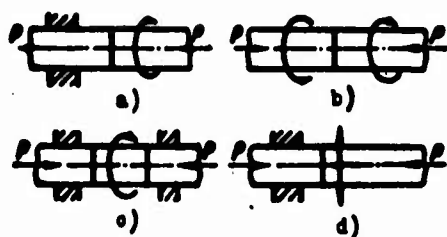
Diagram of welding by friction: a) rotation of one component; b) rotation of two components; c) motionless components with revolving insert; d) reciprocating movement of one of components.
